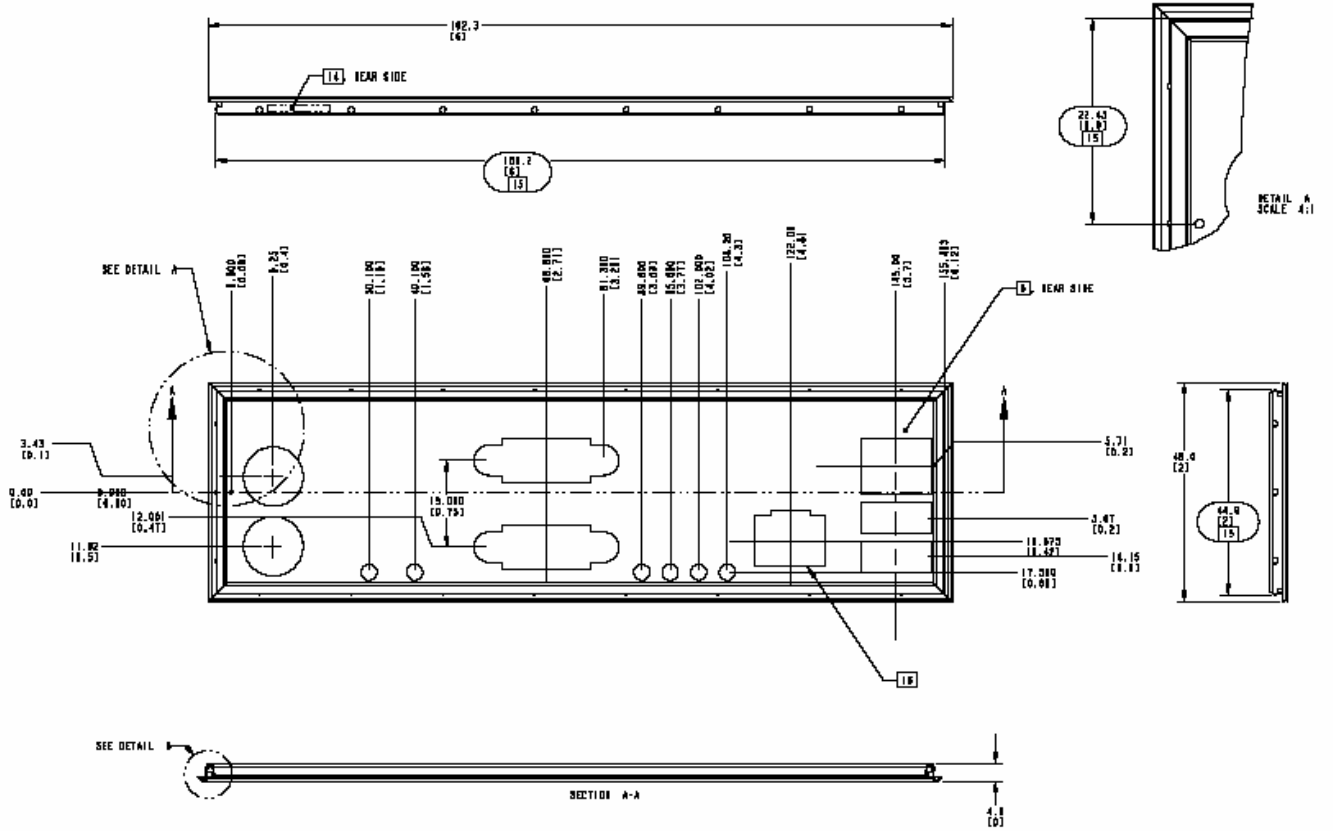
SKU 2 Pedestal Mount I/O Shield Mechanical Drawing
